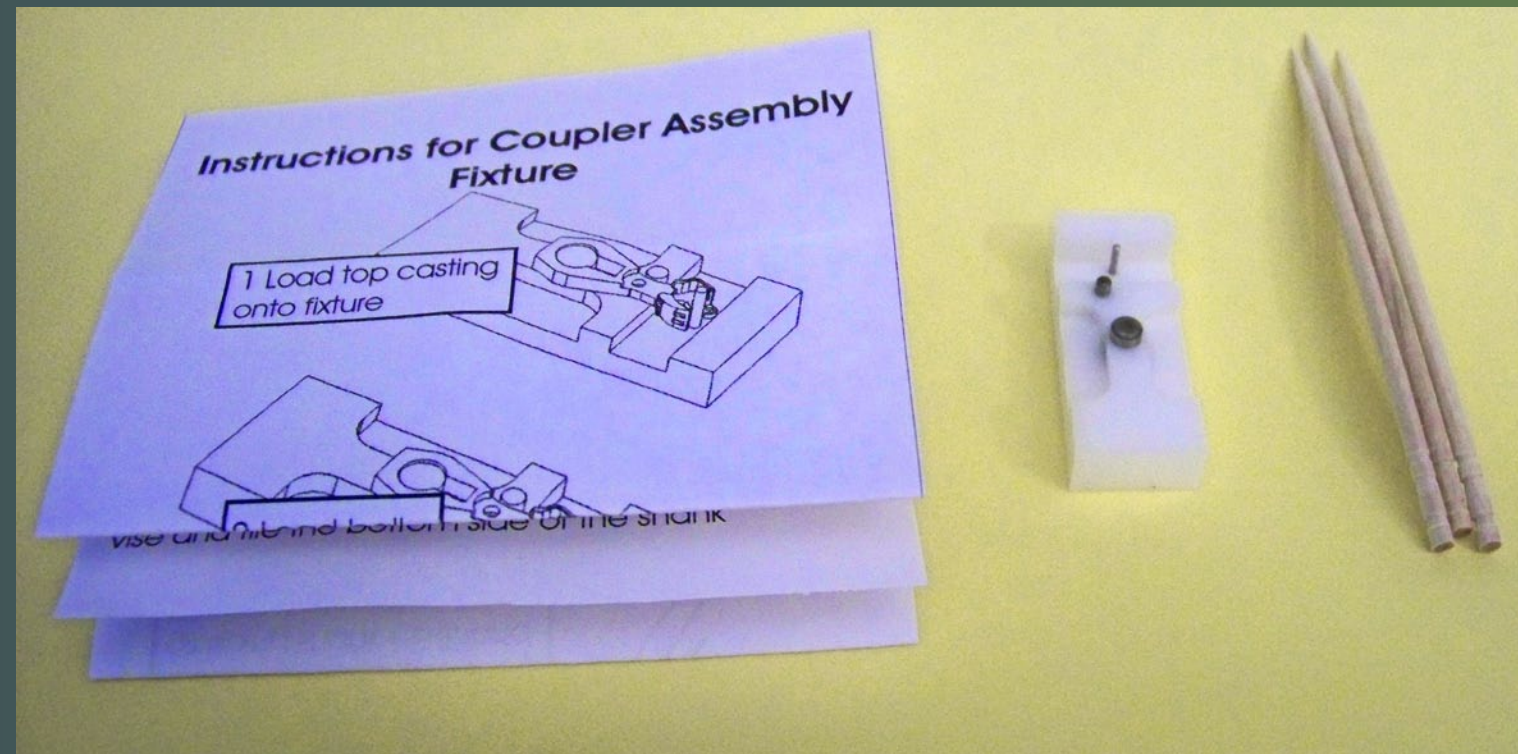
AFC coupler assembly jig with instructions and removal toothpicks. Used with EC87K normal shank coupler kits.
